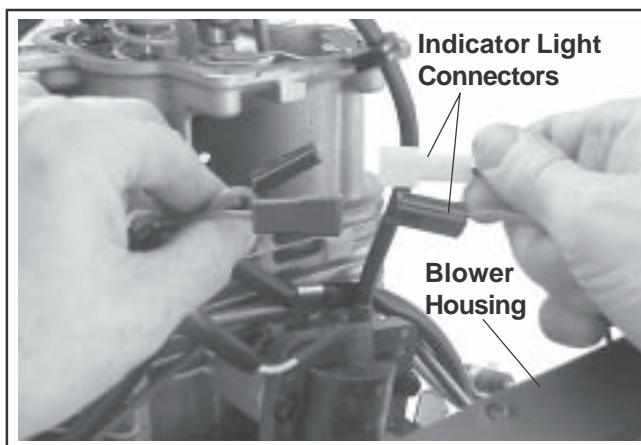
Disconnecting Indicator Light Leads and Removing Blower Housing.
